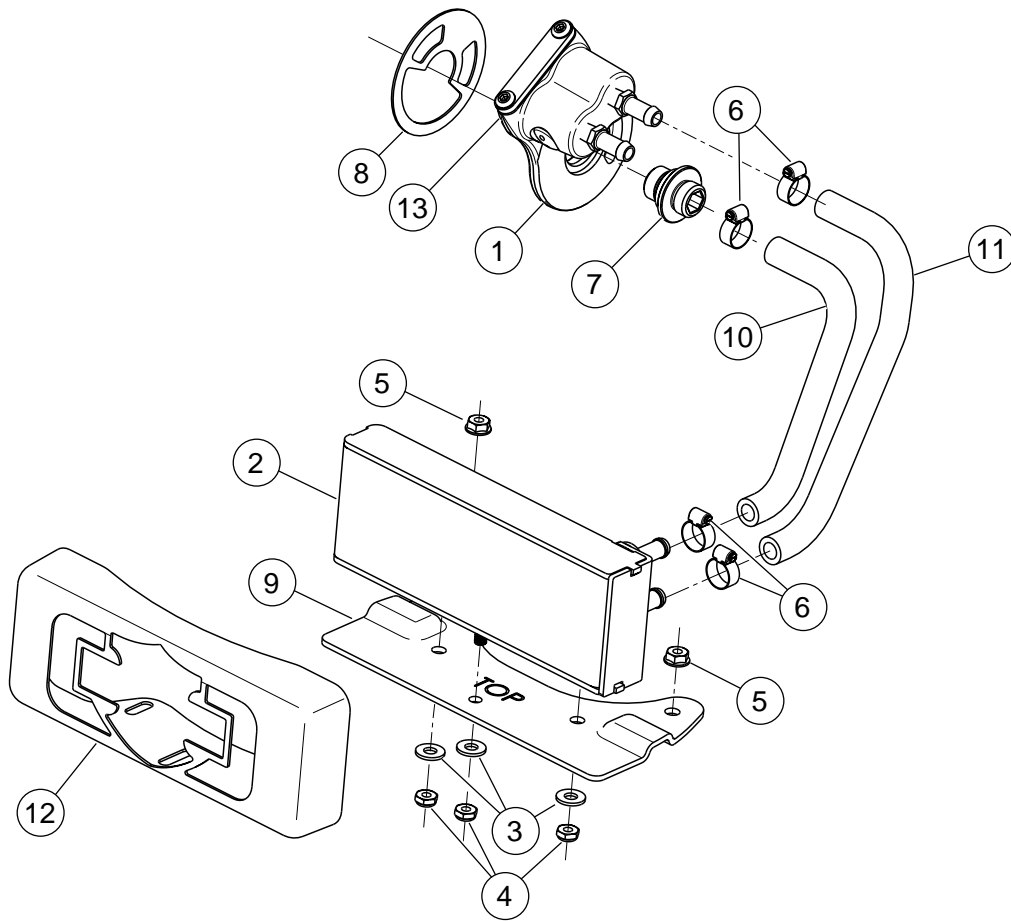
Service Parts for Touring Oil Cooler Kit with Chrome Oil Cooler Cover
